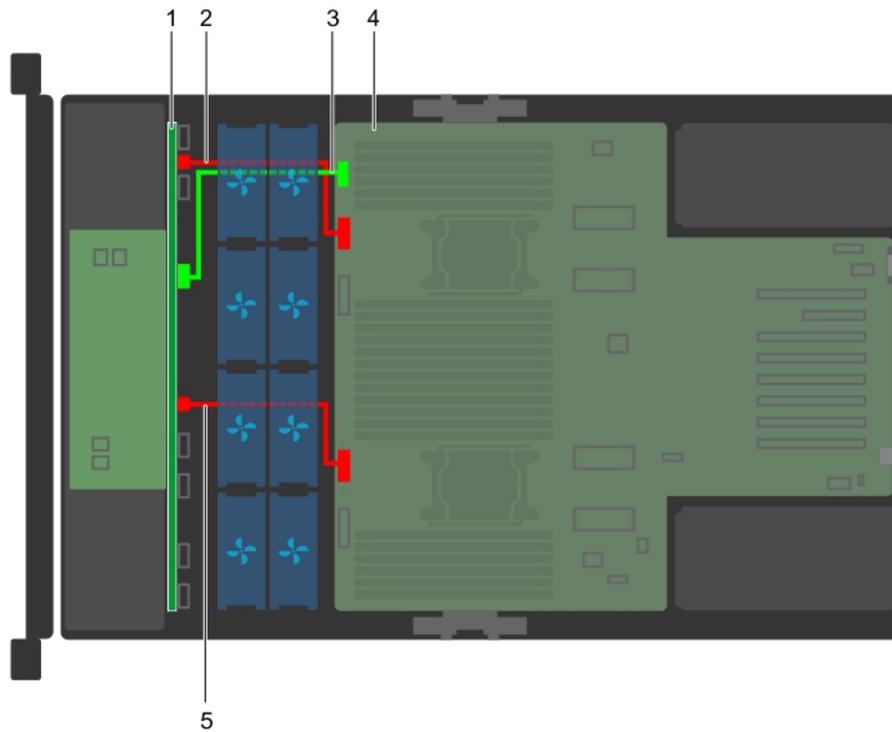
Cable routing – 24 x 2.5 inch hard drive backplane
